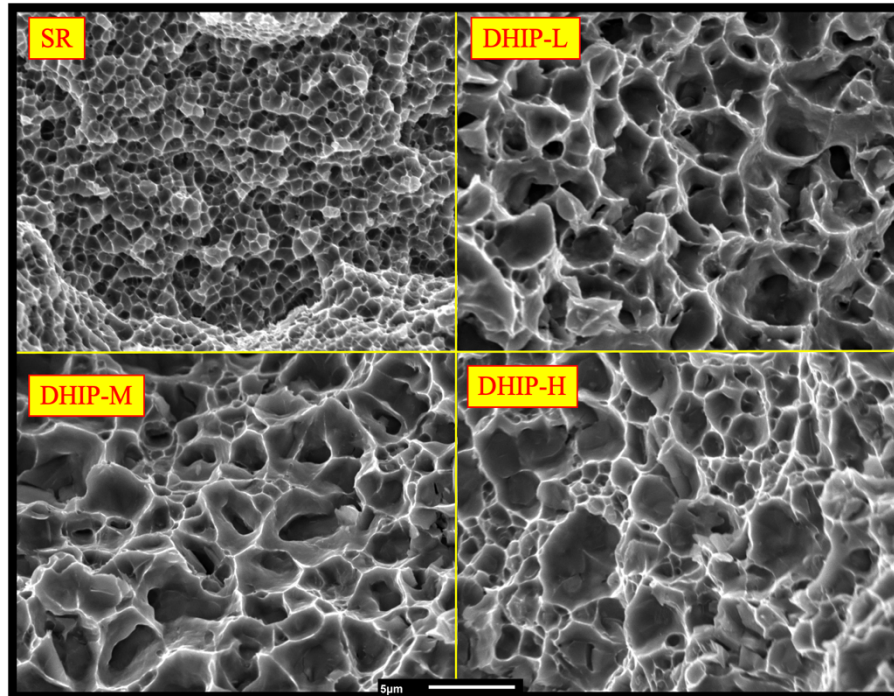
Fracture surfaces of DHIP and SR at x5000 magnification
